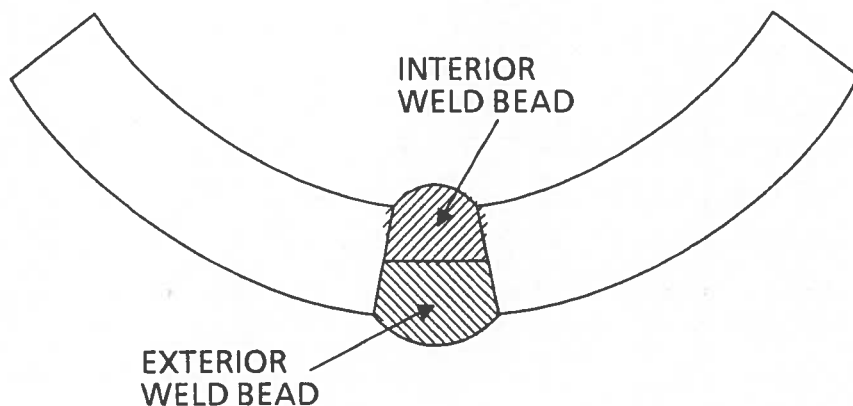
WELD REPAIR REQUIREMENTS
